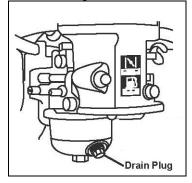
Carburetor Drain Bolt CAUTION: Do not store fuel for more than 3 months.
